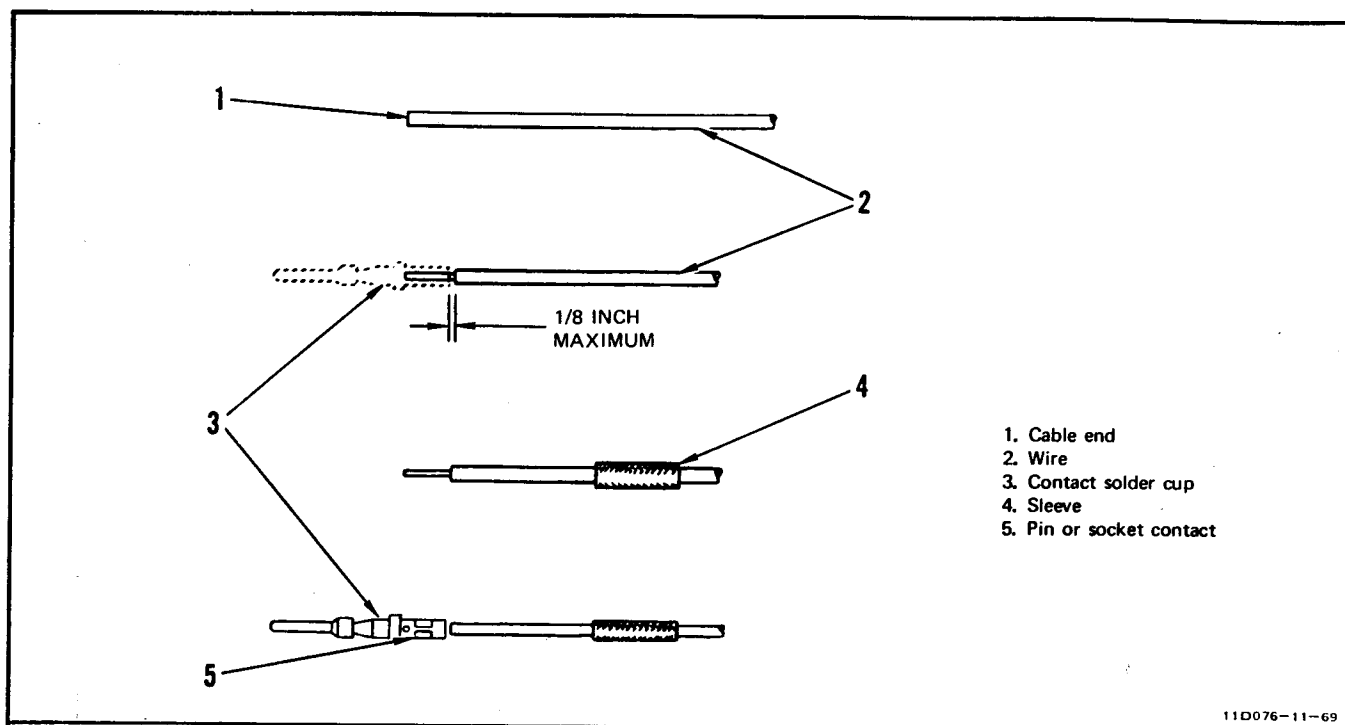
AN and MS Connectors - Solder Contact Repair
